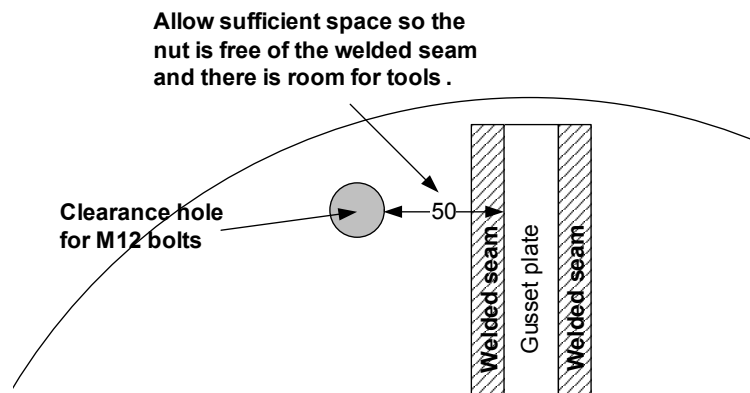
ADU mast flange, distance to the welded seam
